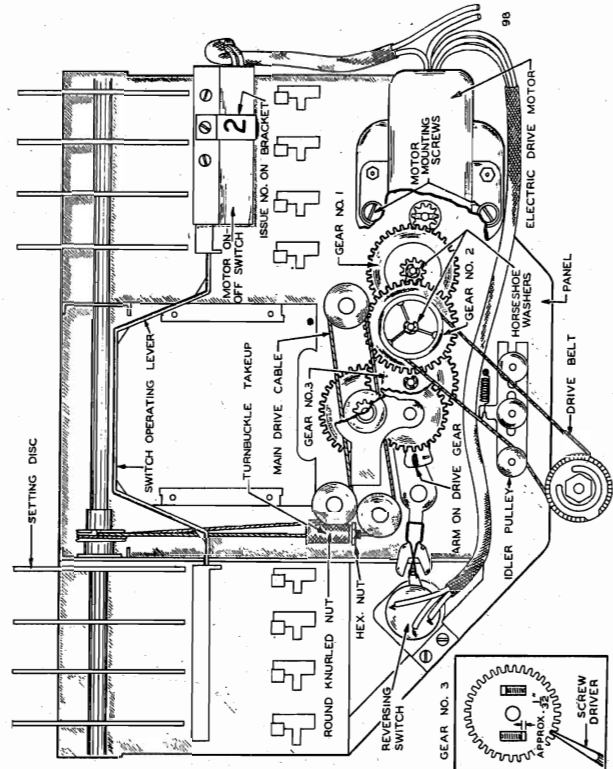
Rear View of Electric Drive Panel Showing Gear Assembly
